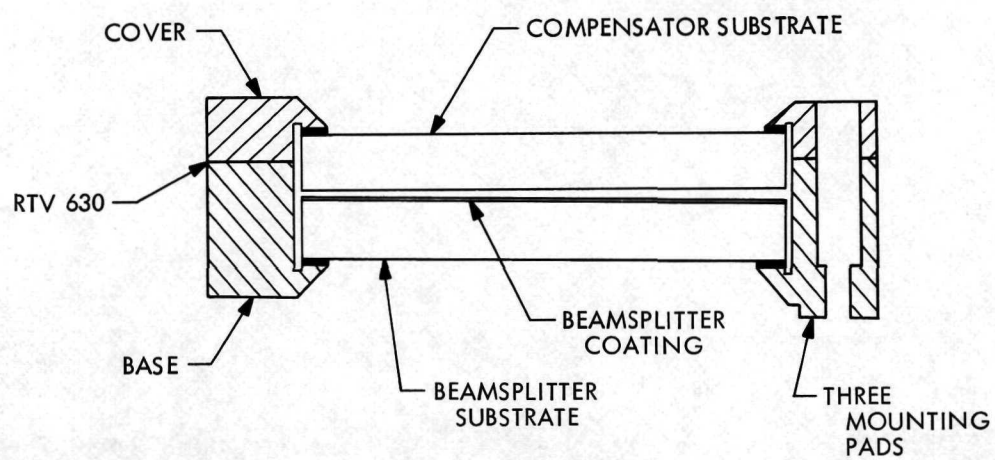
Sectional view of cylindrical CsI beamsplitter assembly
